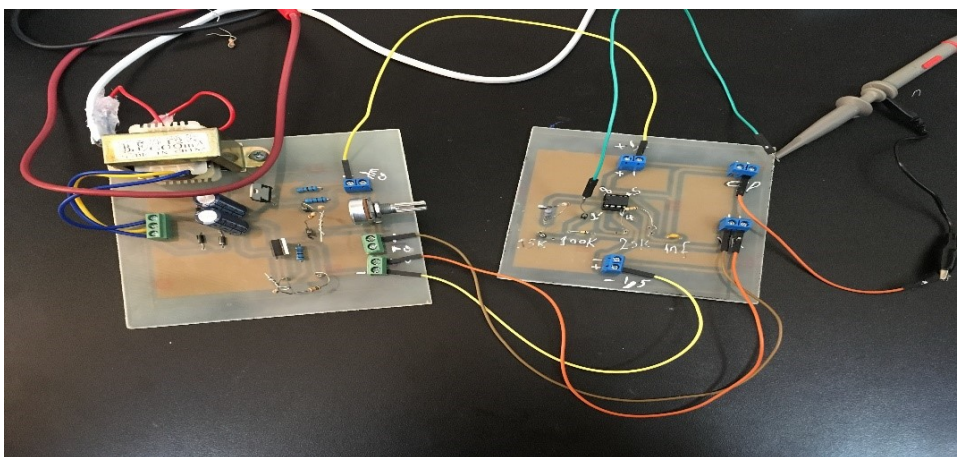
The complete printed circuit boards (PCBs) arrangement for implementing the Resistor-based VCO prototype circuit.
